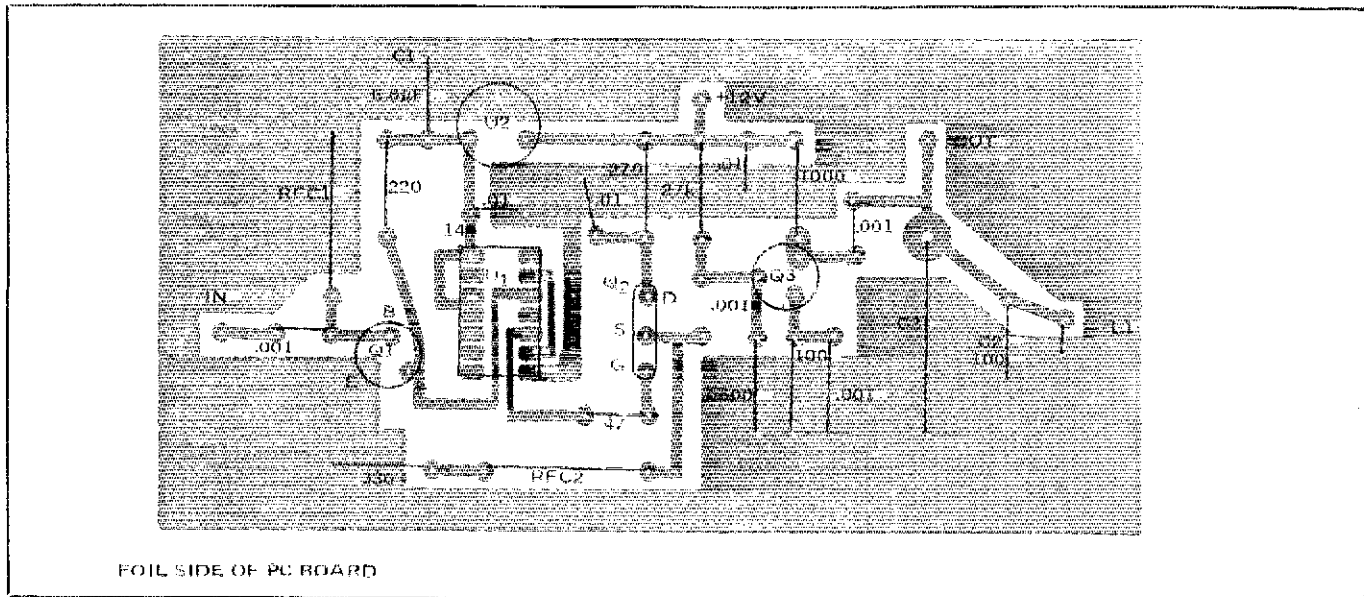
Foil-side scale pattern of pc board. Circuit board is single-sided glass-epoxy material. Grey areas represent copper.
